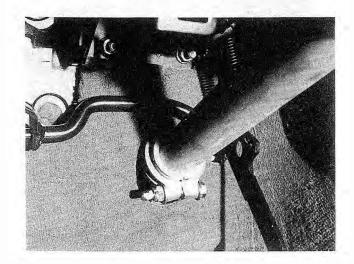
Firewall mounting point for steering column housing. Clamp attaches steering column housing to firewall mount.
